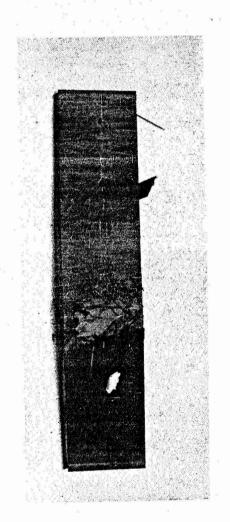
Typical Failure of an Impacted Compression Specimen.
